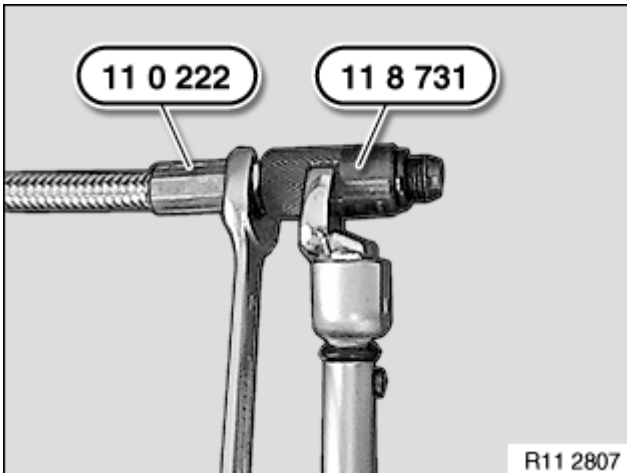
Screw In Special Tool 11 0 222 Into Special Tool 11 8 731
